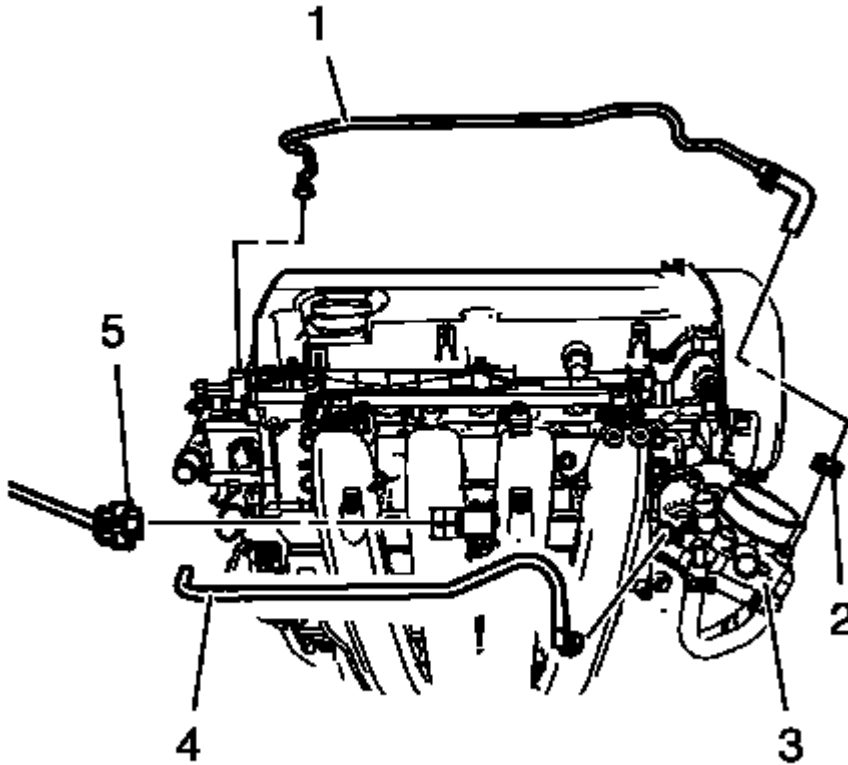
Throttle Body, Throttle Body Heater Inlet Hose And Throttle Body Heater Outlet Hose
